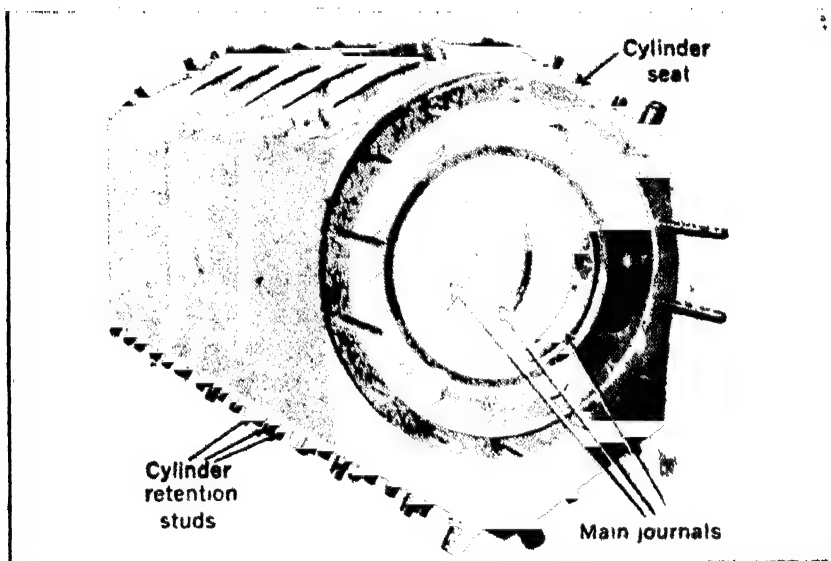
A.—Barrel Type Crankcase Used on the 24-Cylinder Packard X Engine.
